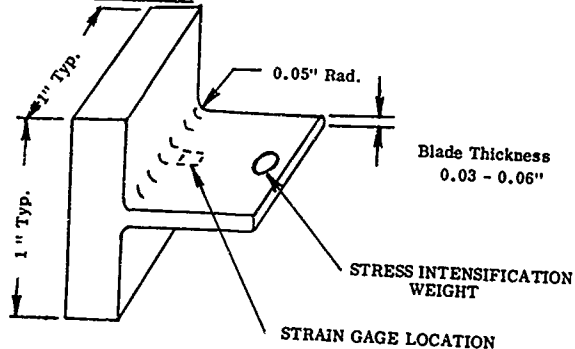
Typical Dimensions of Tensile and Fatigue Test Specimens Sectioned From Straight Vane Wheel Castings
